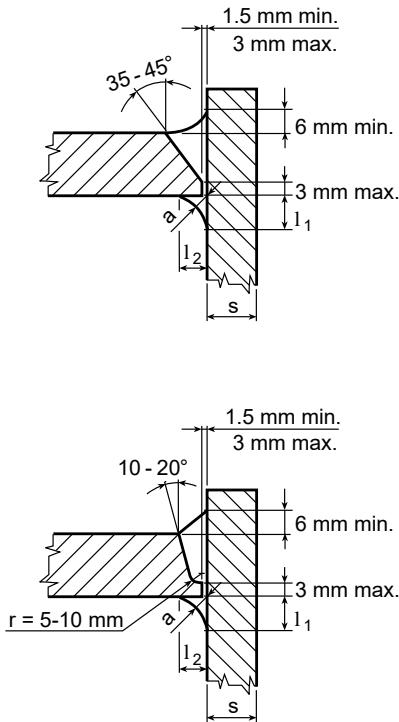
Attachment of un-flanged flat end plates or tube plates to shell (examples)
